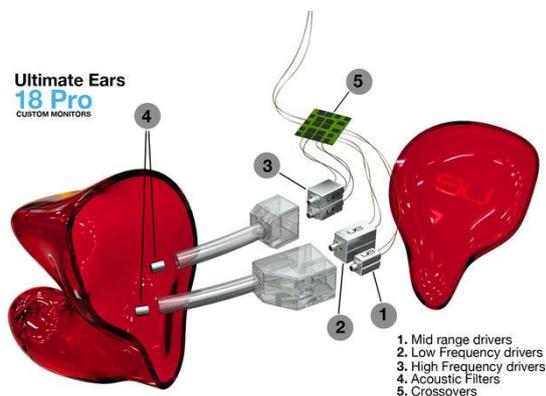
Exploded view of a multi driver custom in-ear monitor. Copied from Ultimate Ears [1]
